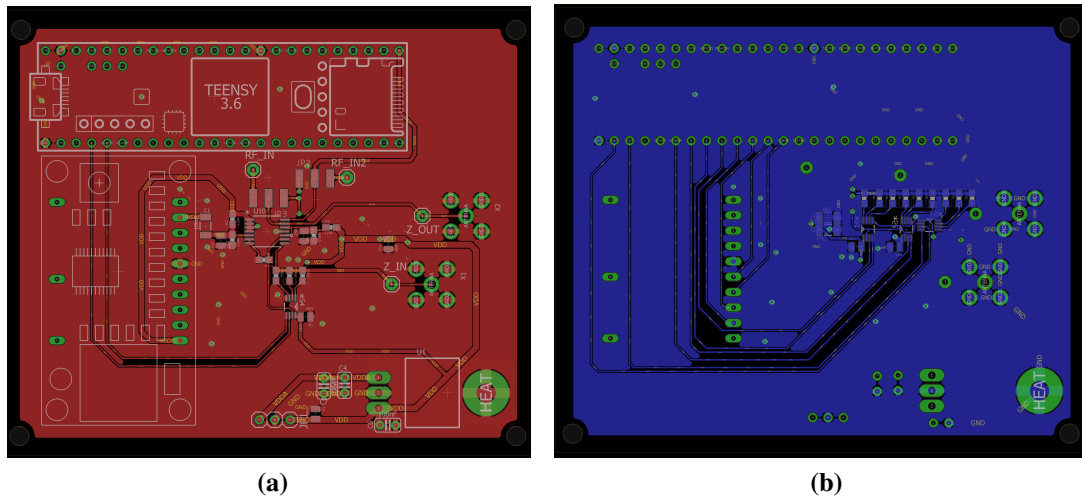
Double sided PCB layout (a) top (b) bottom layers
